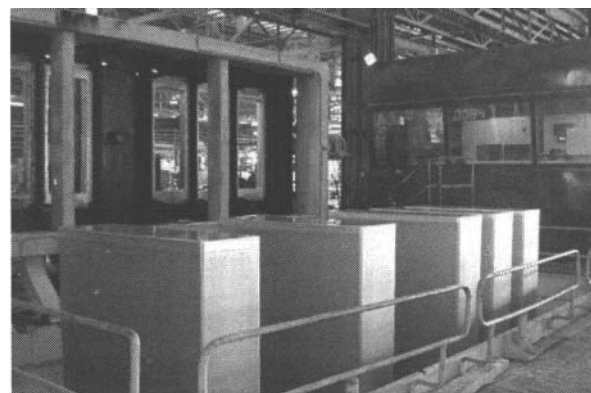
DC6 Casting Unit with 460 mm thickness Rolling Ingots
